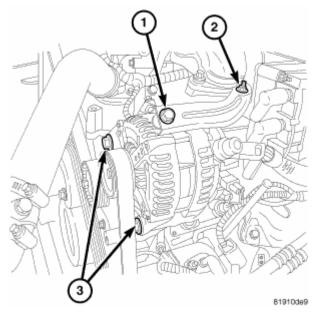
Generator Mounting 3.8L Courtesy of CHRYSLER LLC
